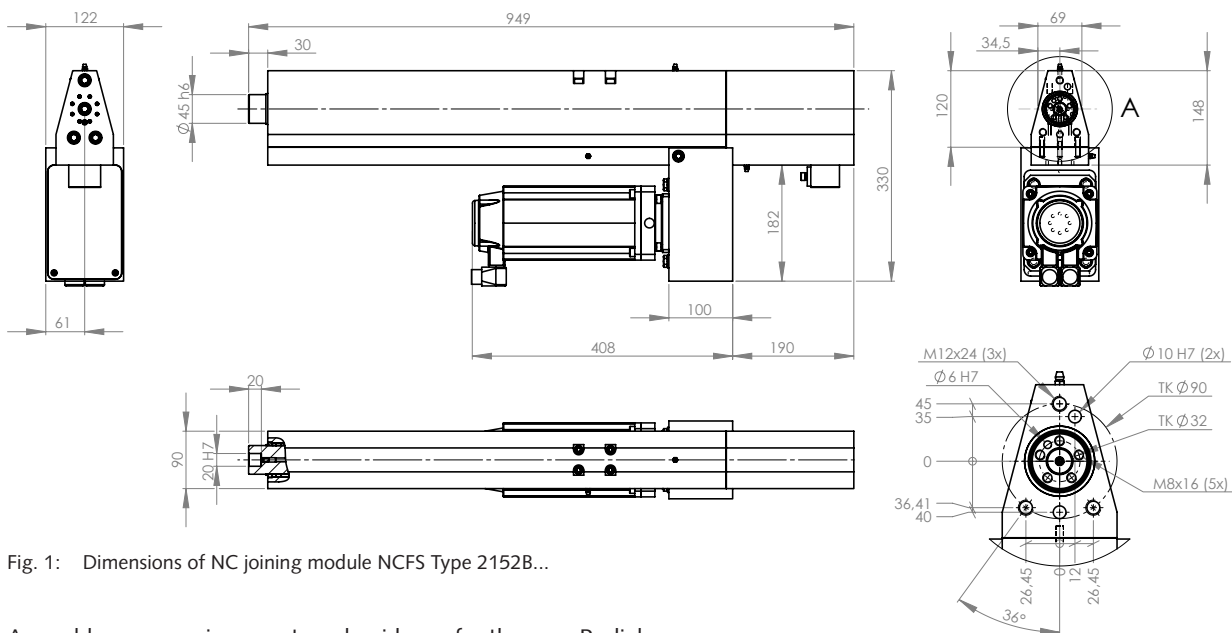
Dimensions of NC joining module NCFS Type 2152B...
